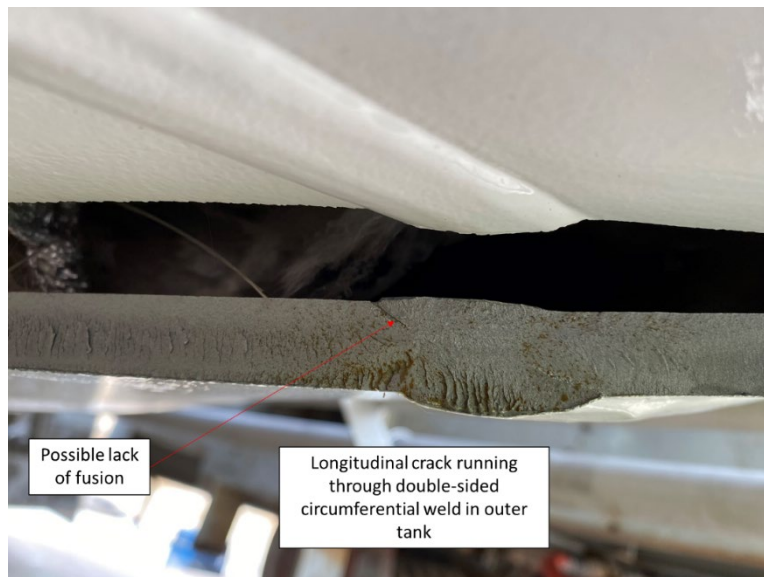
Crack Passing Through Double-sided Circumferential Weld
